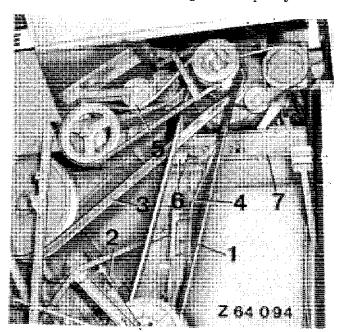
Preparing to Remove Engine (Combine 965 - Left-Hand Side)
